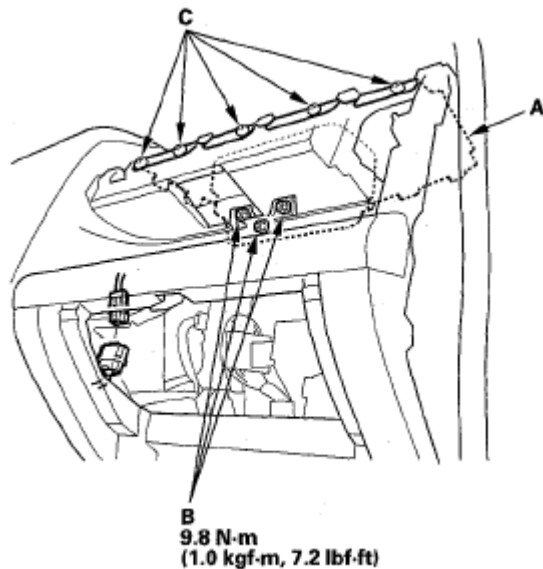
Identifying Front Passenger's Airbag Mounting Nuts And Screws
